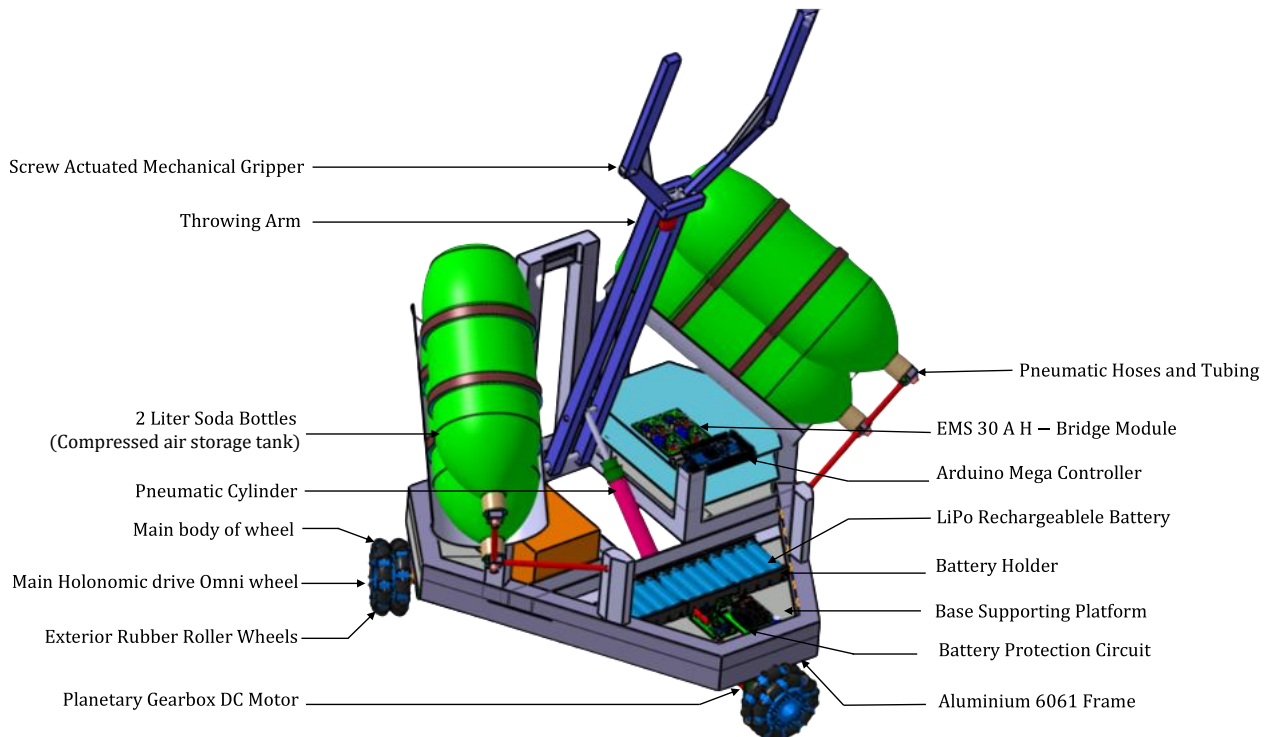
Three-wheeled holonomic passing robot design (MR1)
